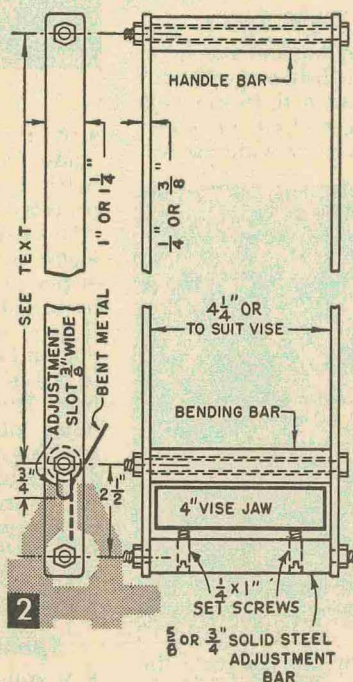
Sheet metal bender mounts in machinist's vise and adjusts for making sharp or easy bends.
